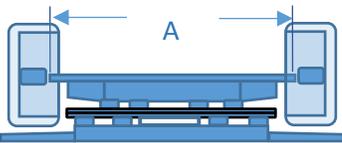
Axle bearing atop the axle base is balanced on the 5<sup>th</sup> wheel.
